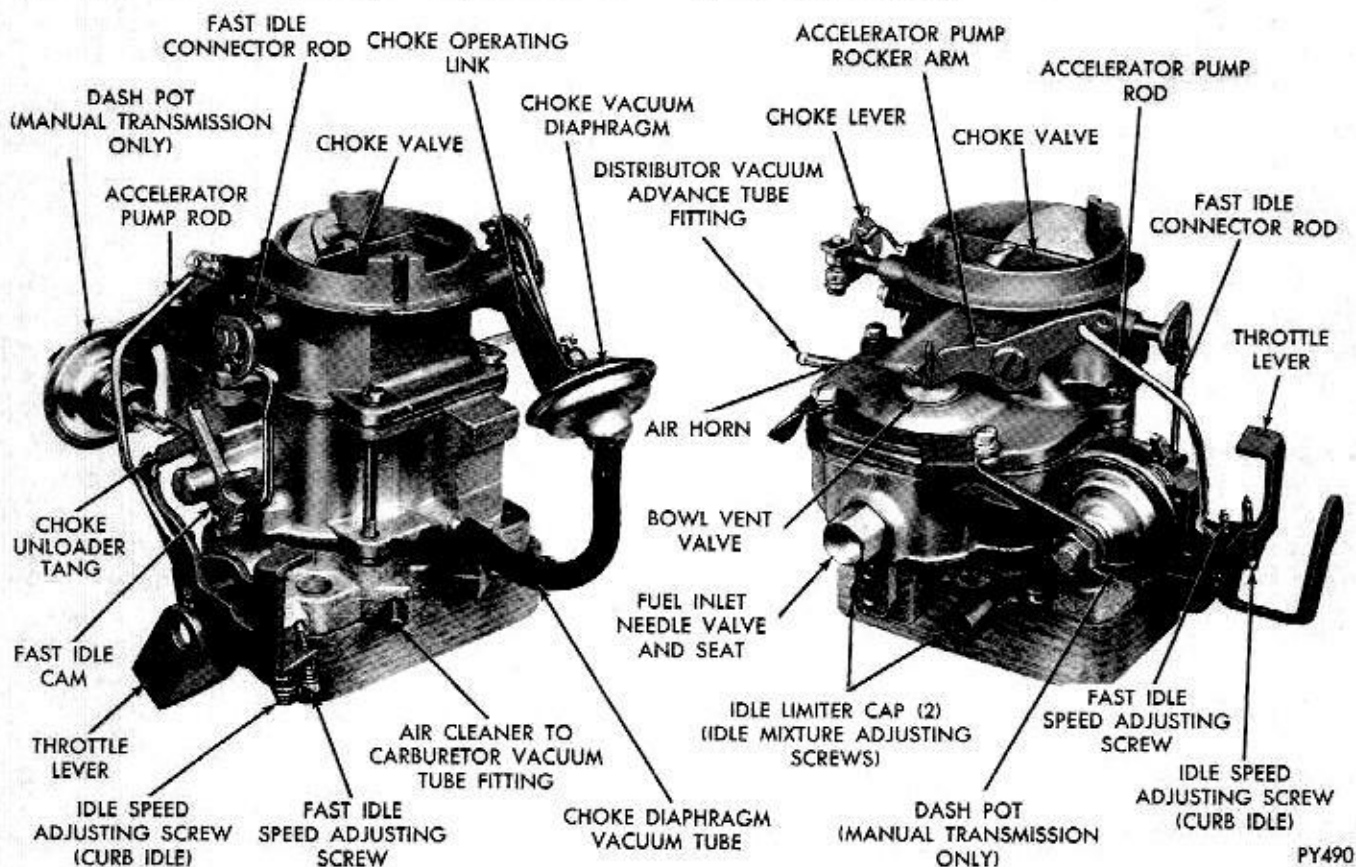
Carburetor Assembly (1-1/4 inch BBD) C.A.S.
